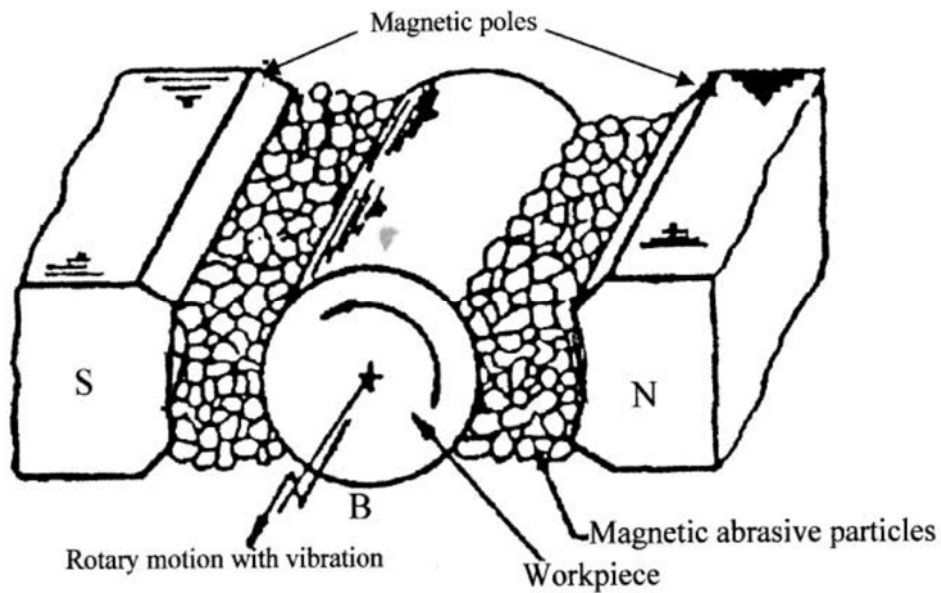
External Finishing of Cylindrical Surfaces [35]
